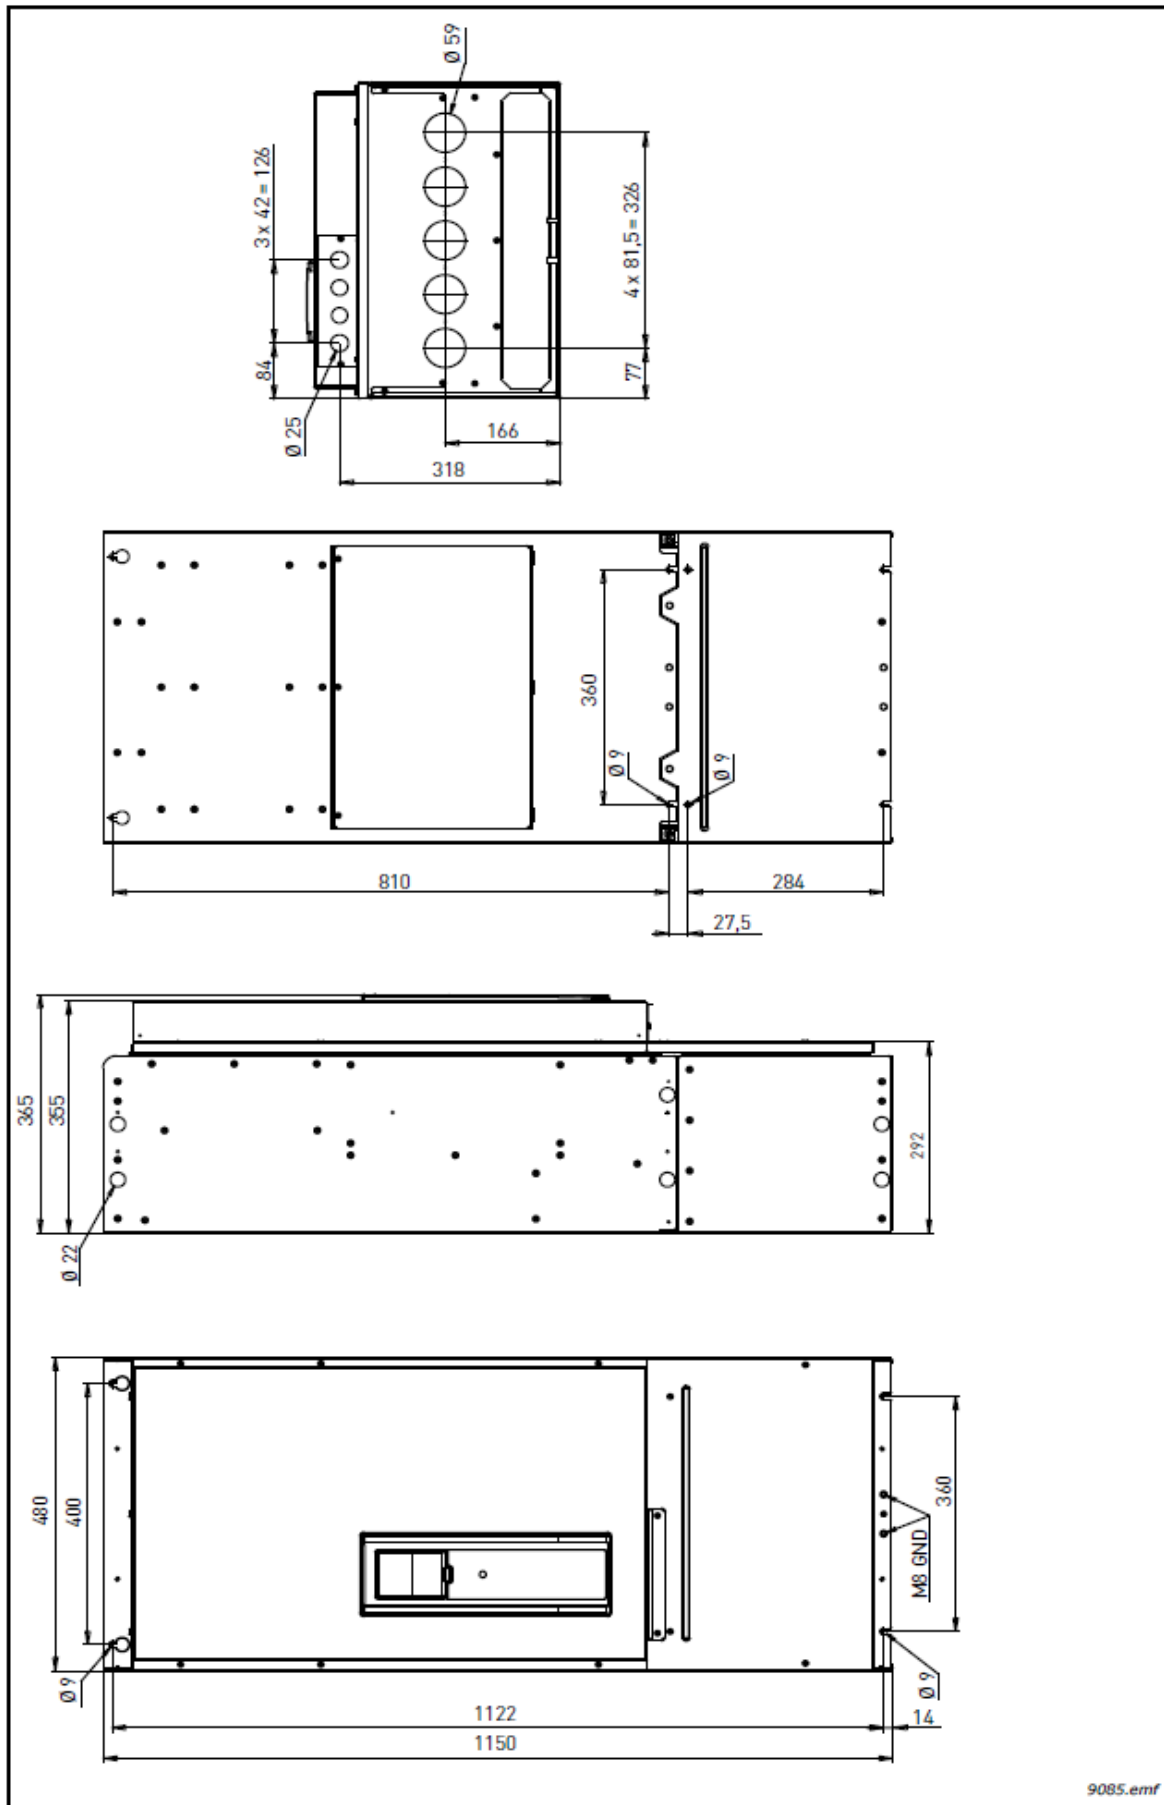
Vacon AC drive dimensions, MR9 IP21 and IP54
